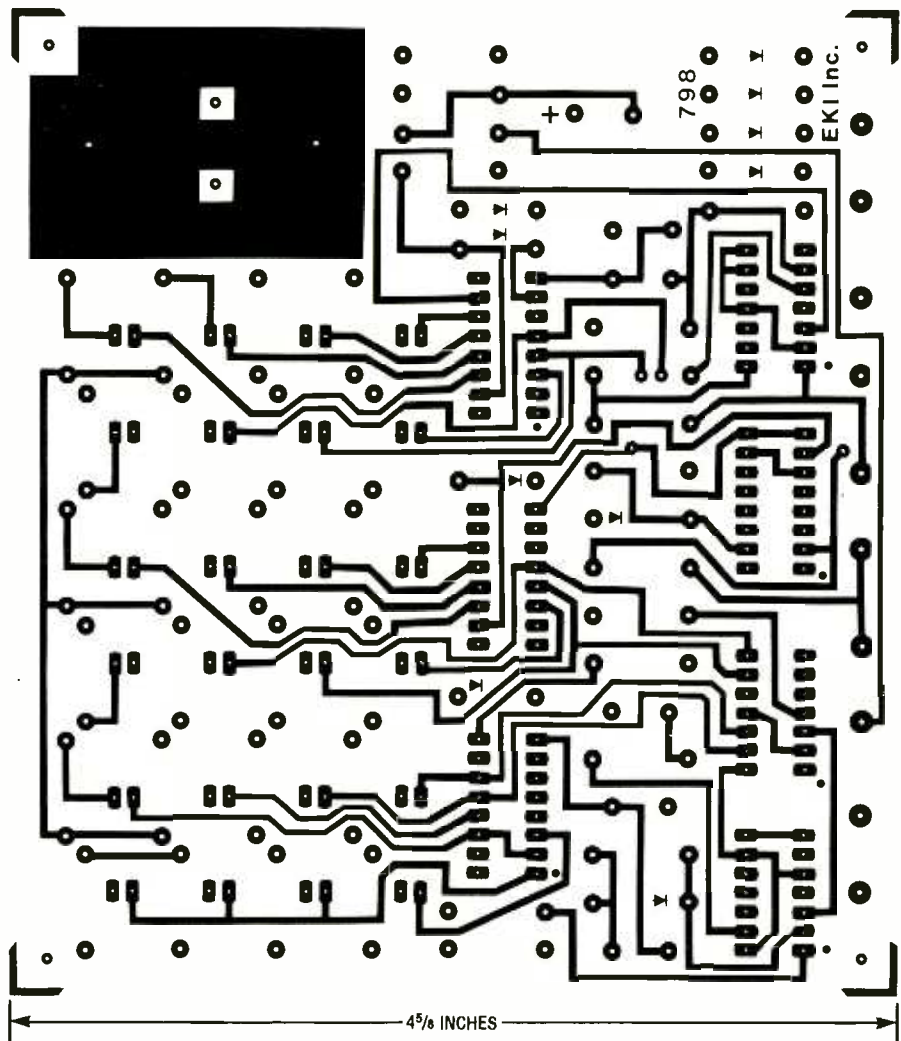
The Binary Clock was built on a double-sided printed-circuit board; the component side is shown here.
